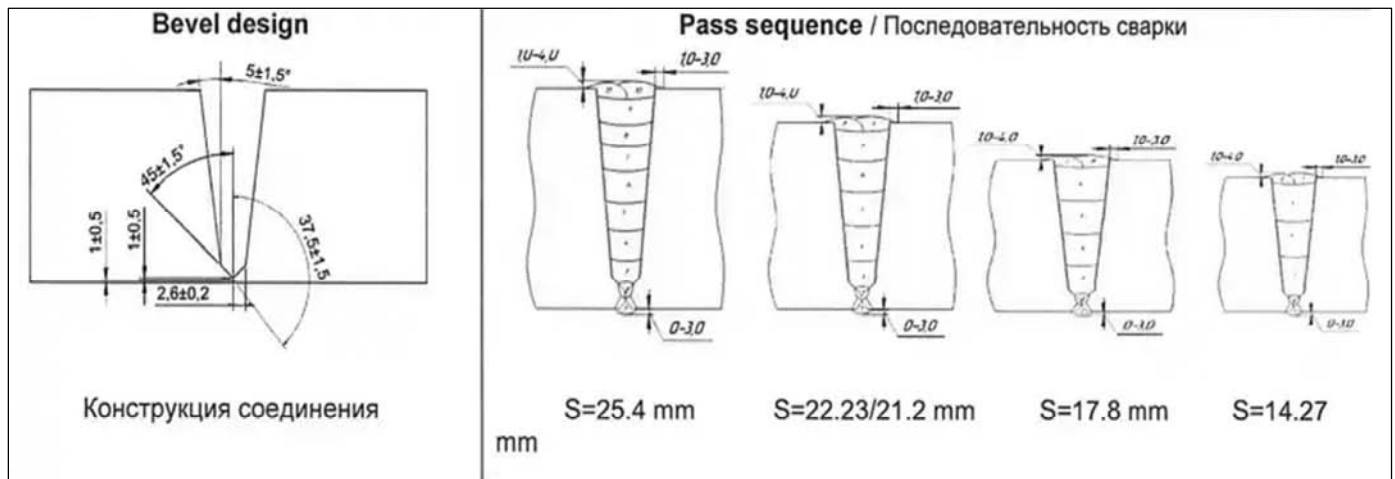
Pipe ends preparation with IDC for automatic welding
